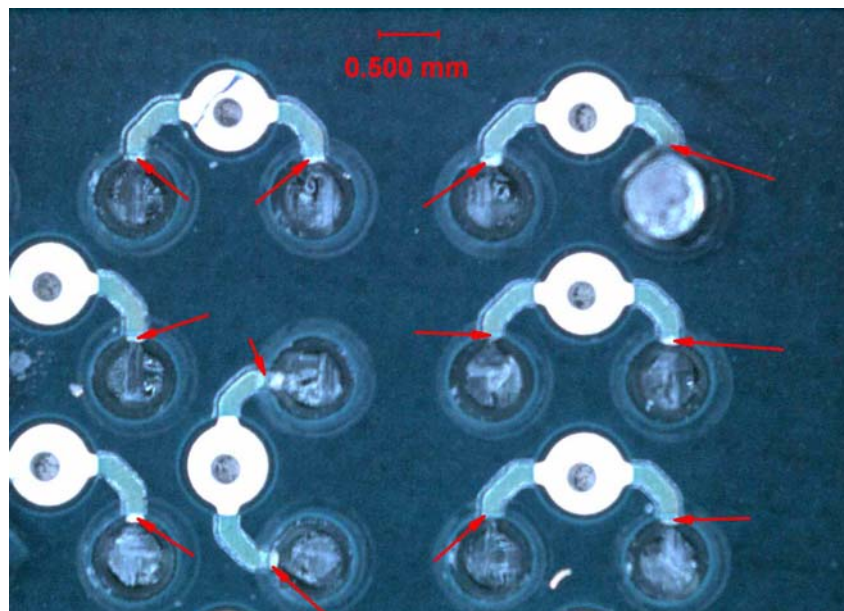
Broad 29, SnPb “Manufactured”, BGA U44, PCB trace failure at BGA Ball 1R, illustrating a complete failure
